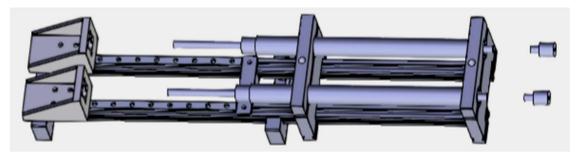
Extruder assembly. The assembly is pictured horizontally, although the final design has it mounted vertically.
